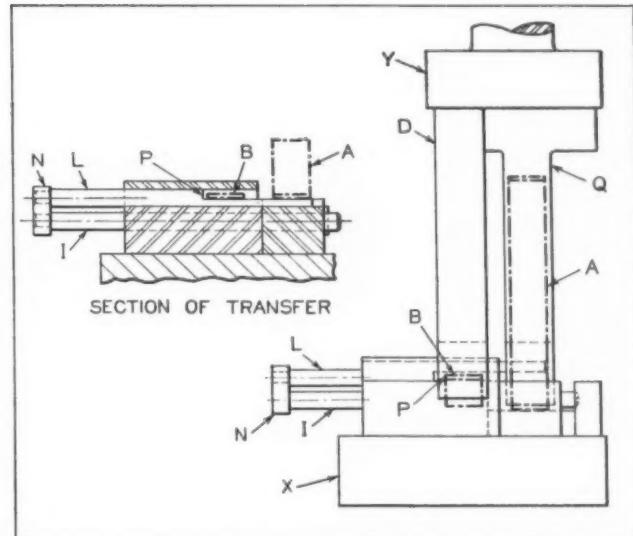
Section of Transfer and End View of Die Shown in Fig. 1
